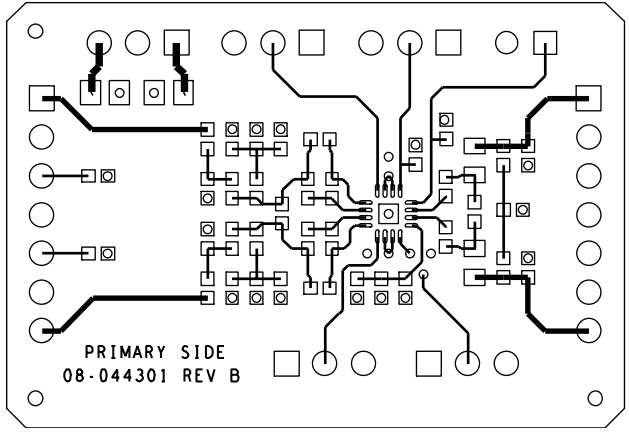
AMC-ADA4945-1EBZ Evaluation Board Layout Pattern, Primary Side
